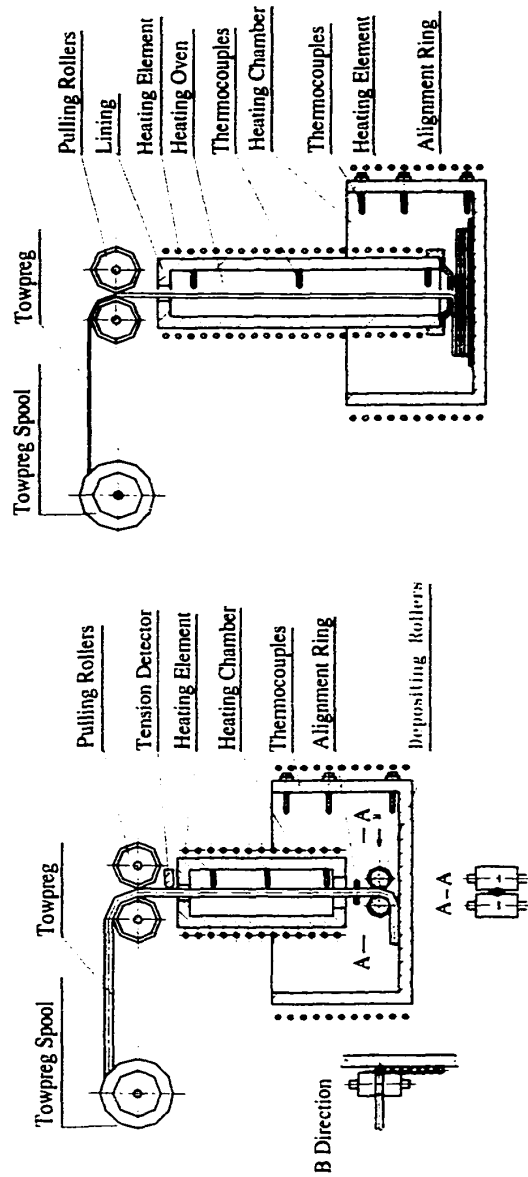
A a couple of deposition roller is positioned near the bottom of the heating tube to pull the molten towpreg downward and to help the towpreg roll to a desired location.
